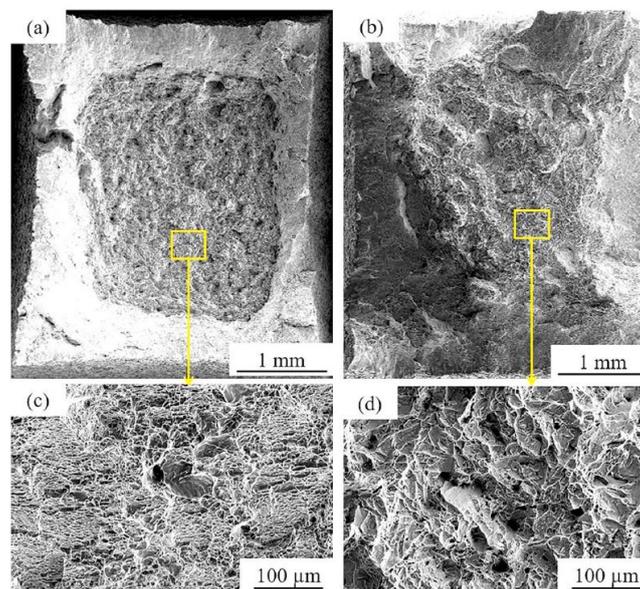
Tensile fracture surfaces from (a) reference and (b) contaminated specimens with respectively enlarged views on (c) and (d) (Biswal *et al.*, 2019).
